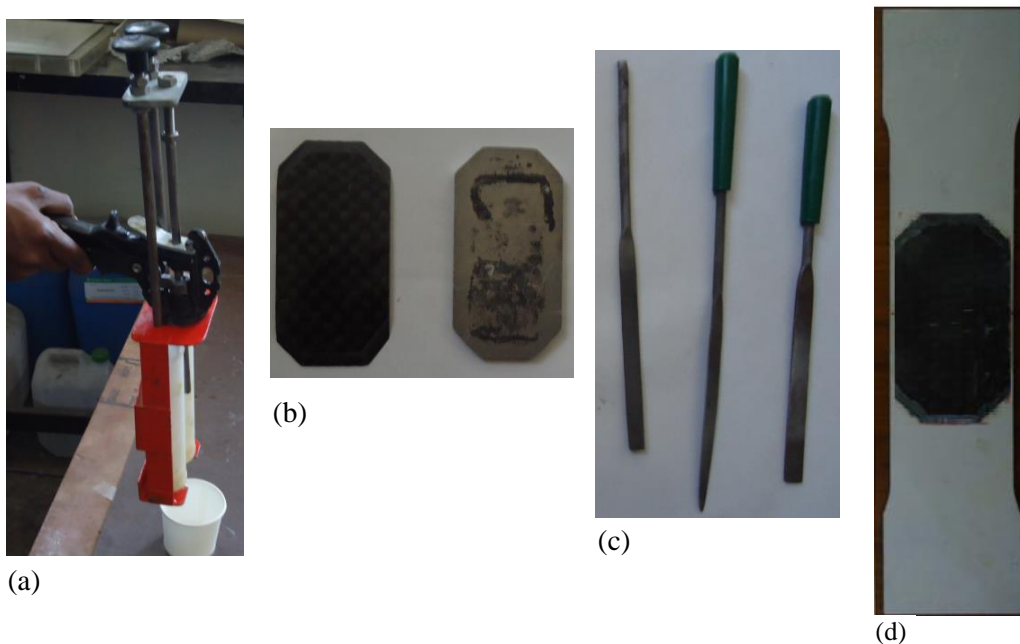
Fabricated repaired specimen (a) adhesive applicator gun (b) CFRP patch and octagonal patch template (c) tools used for making patch (d) single sided repaired panel
